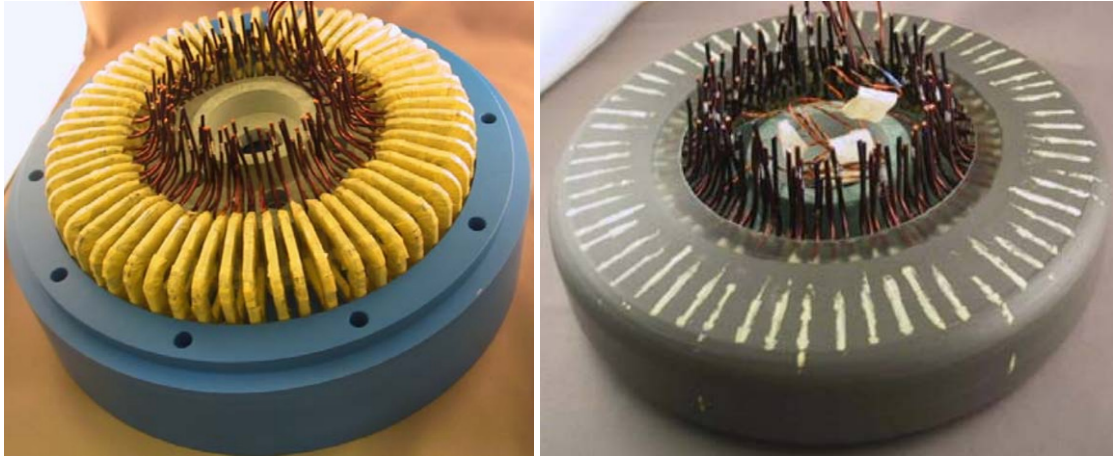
Toroid machine [8], bottom half of the mold together with the mounding disk for the coils and the coils (left), and rotocasted stator core (right).
